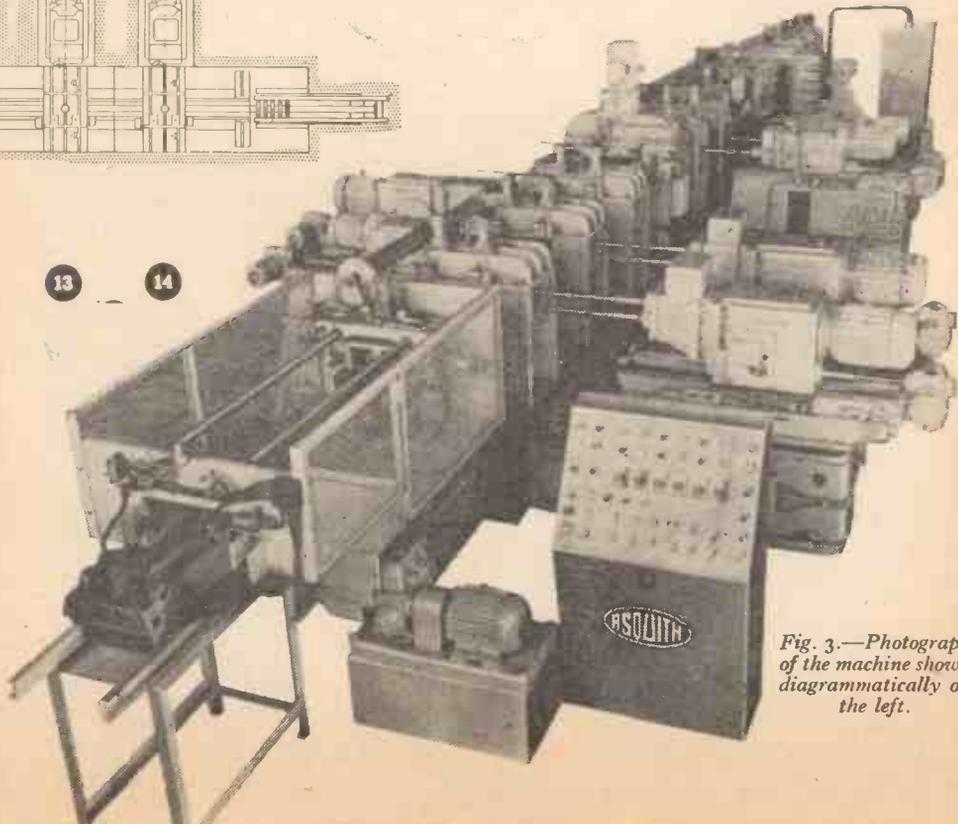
Photograph of the machine shown diagrammatically on the left.
